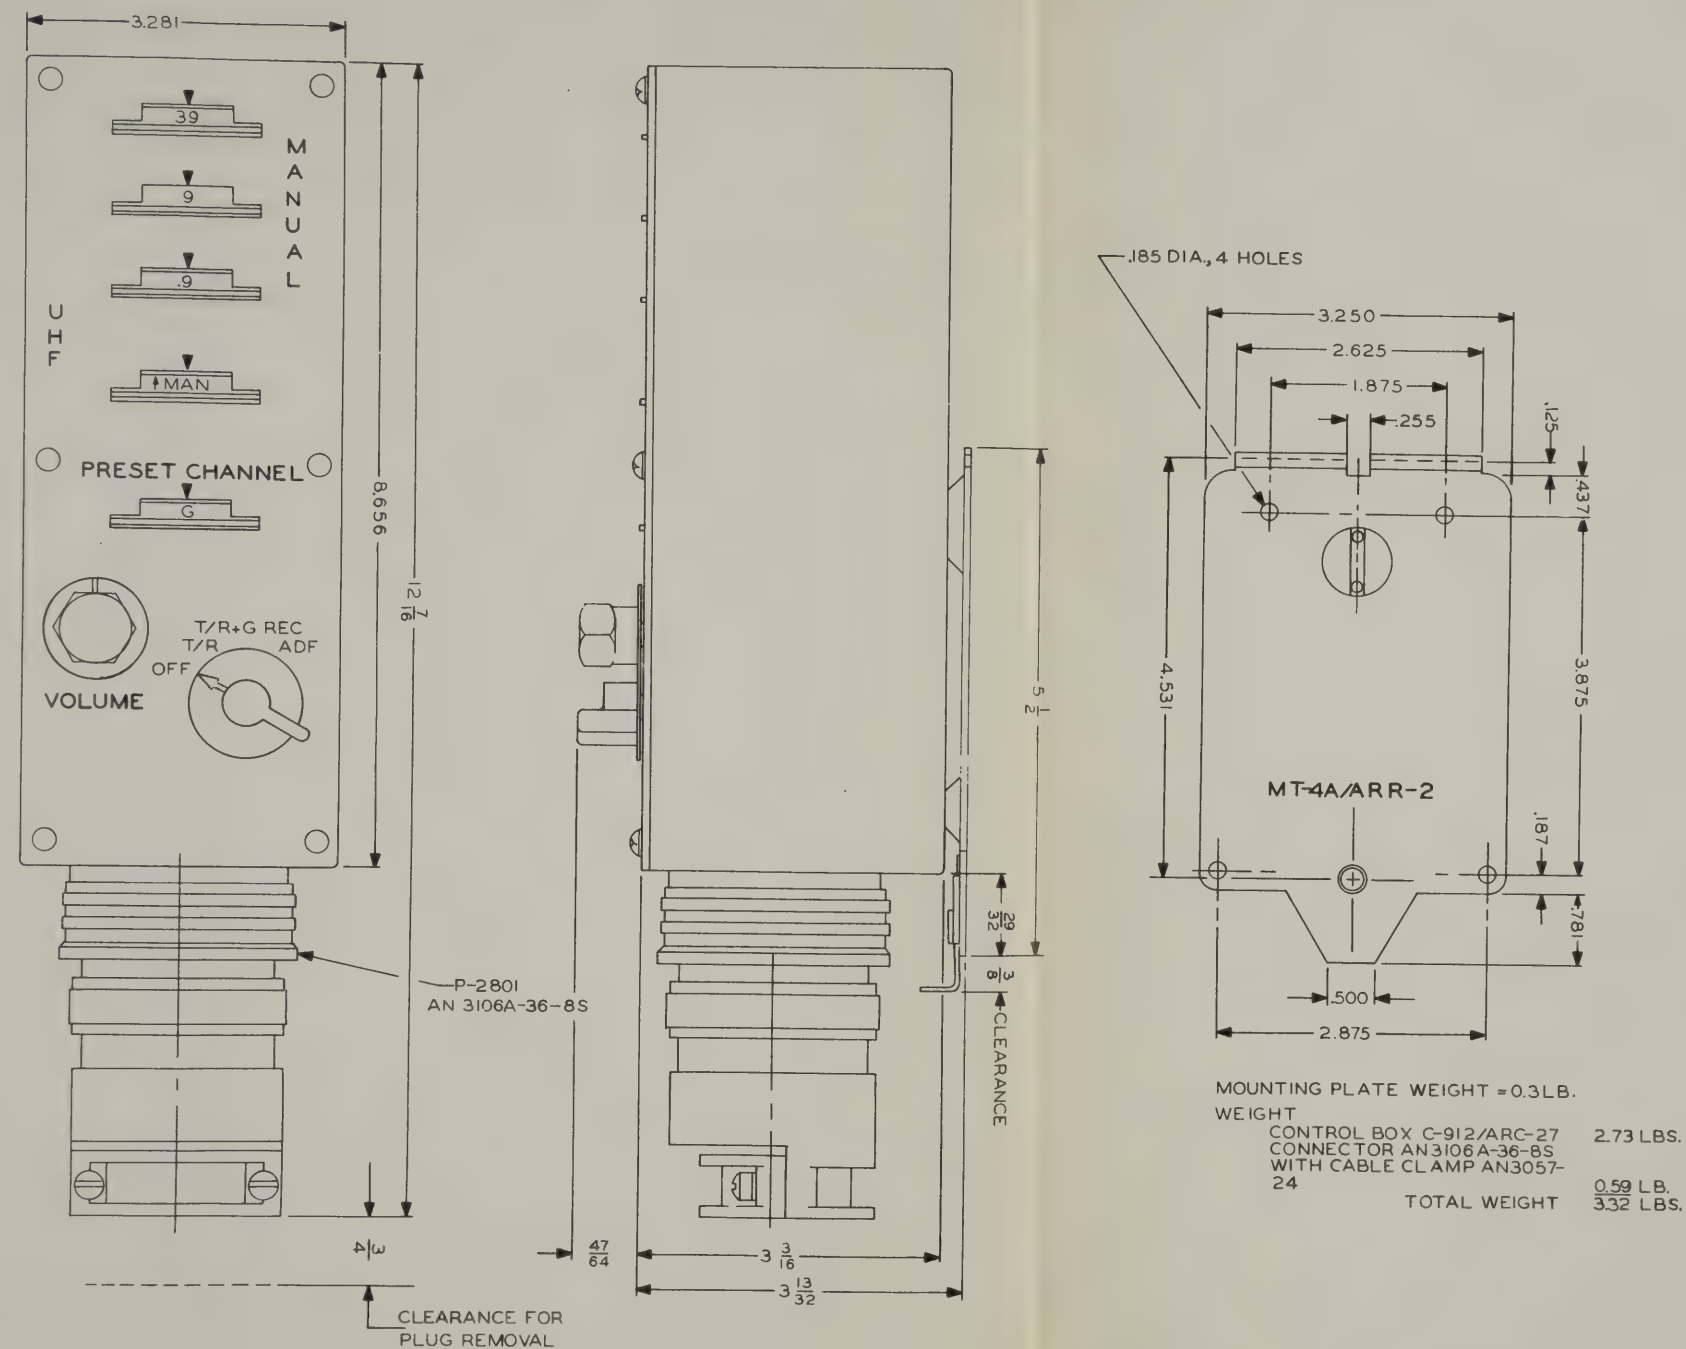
F. Radio Set Control C-912/ARC-27, Outline and Mounting Dimensions
